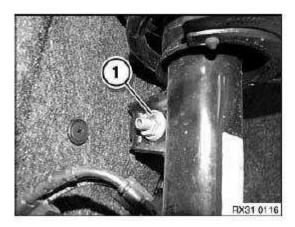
Identifying Nut Courtesy of BMW OF NORTH AMERICA, INC.
